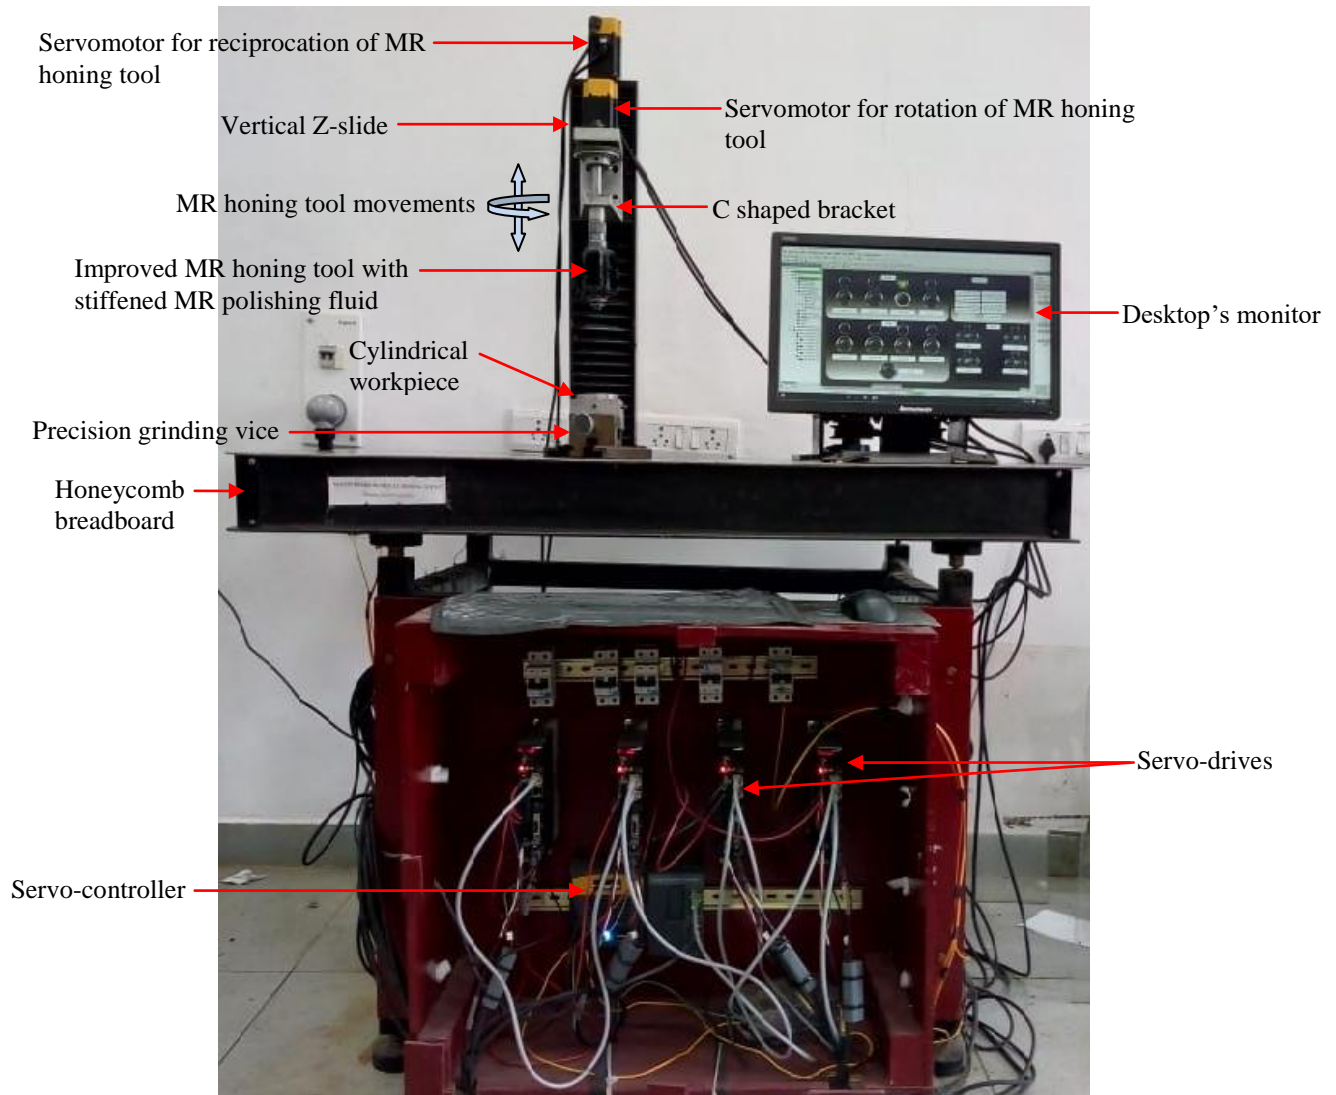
Photograph of the experimental setup of MR honing process with the improved design of tool with curved end magnetic surfaces for nano-finishing the inner surface of the cylindrical workpieces with different diameters.
